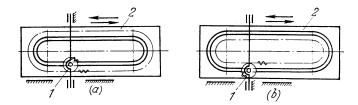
Diagram of a geared reversing mechanism for converting rotary motion into rectilinear reciprocating motion
